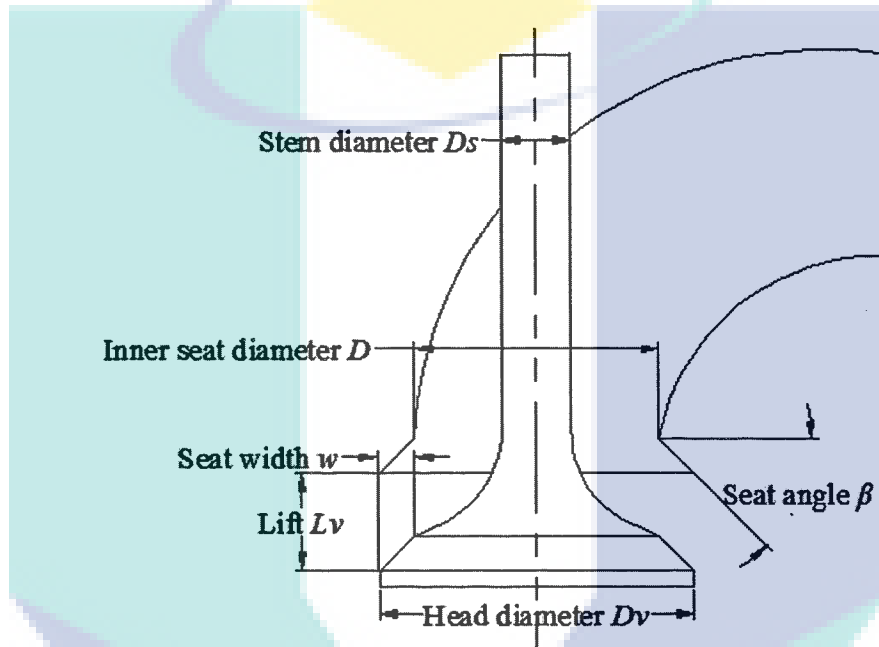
Valve geometry for most engines with parameters defining the valve
